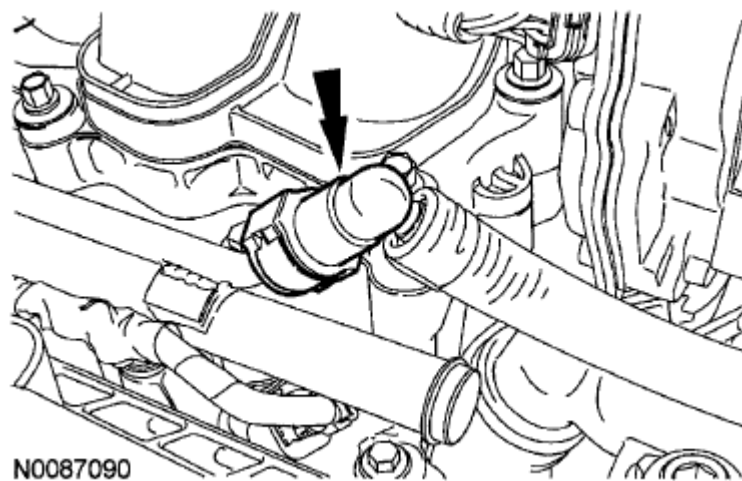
Locating Fuel Supply Tube Quick Connect Coupling
